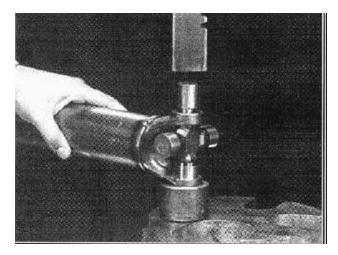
Press Plug Through Upper Bearing Assembly to Release Lower Bearing Assembly
